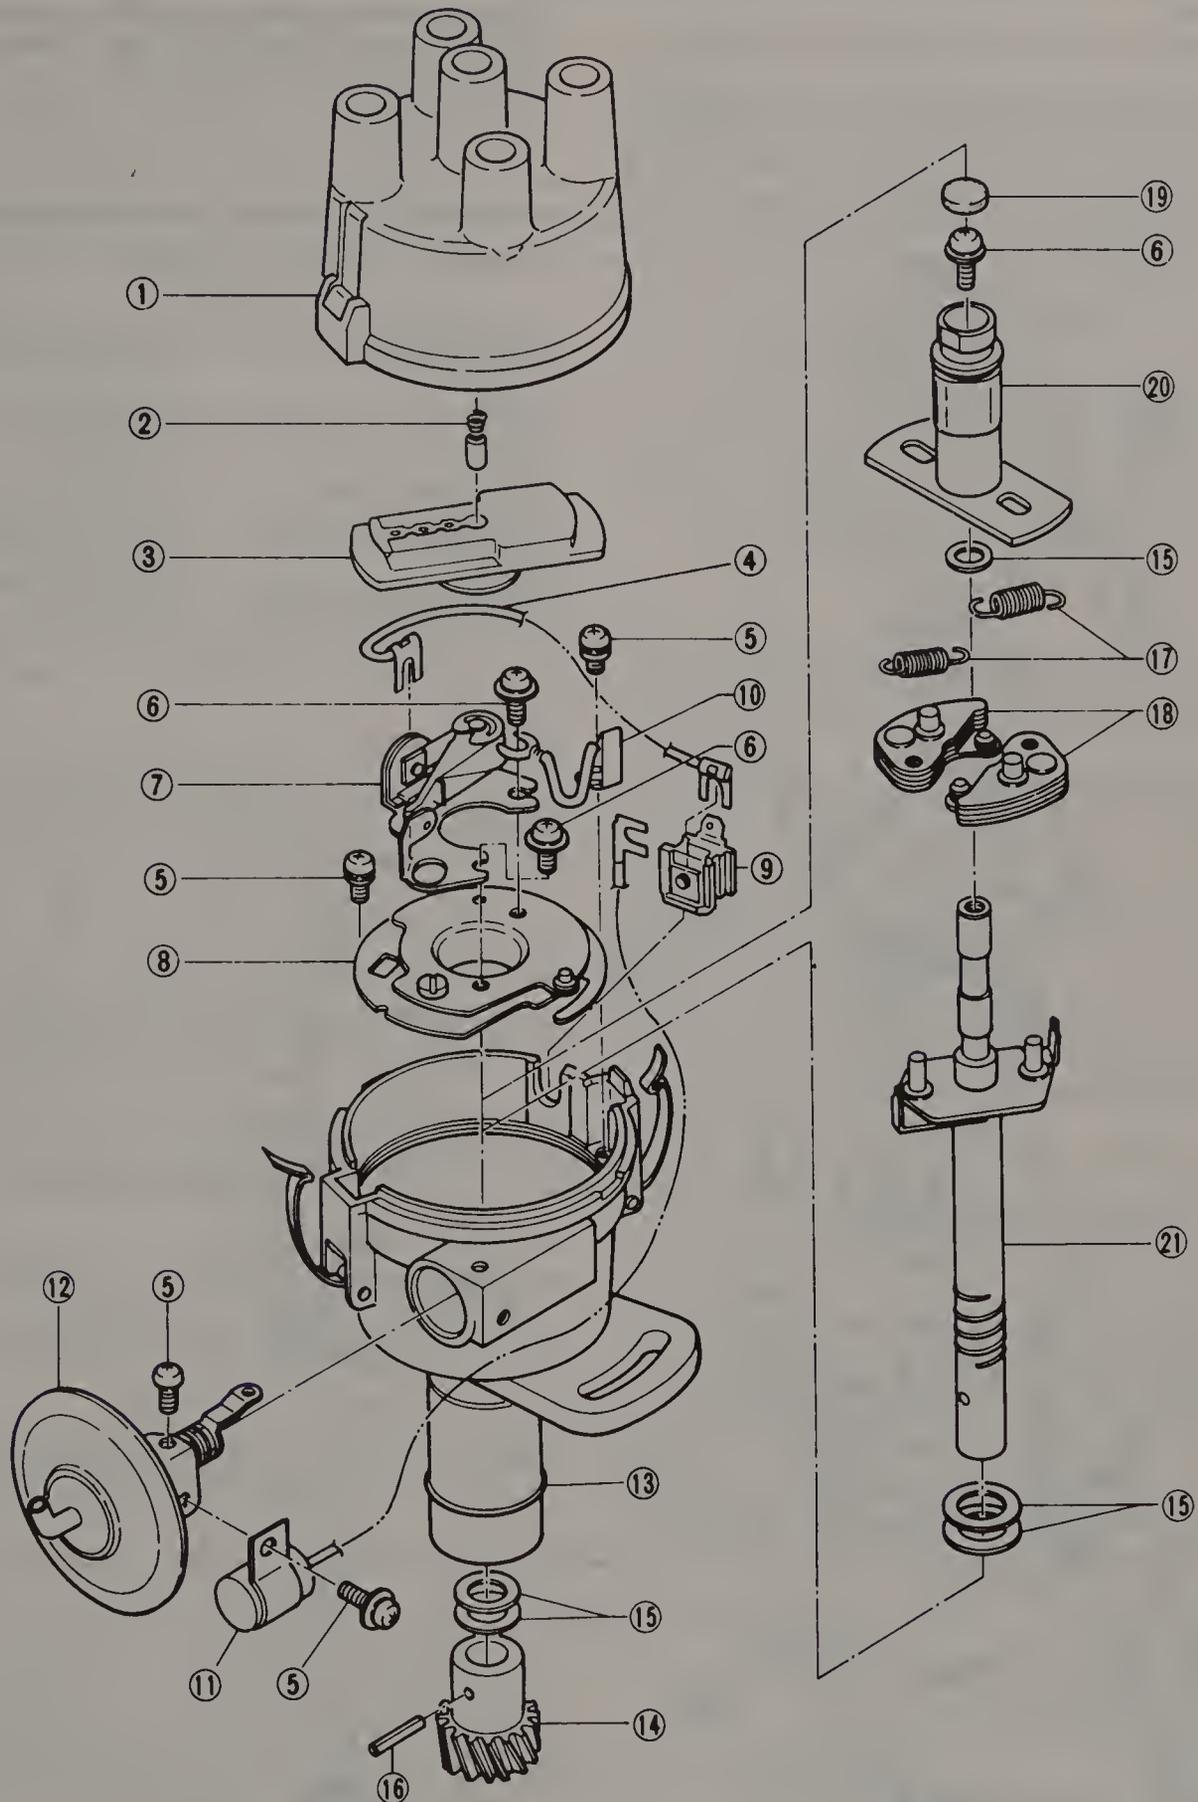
Distributor components (breaker points) – exploded view (Sec 11)
